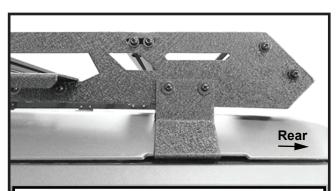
Line up the mounting holes in the front Wind Deflector with the threaded holes in the Mounting Brackets, and attach with each other. IMPORTANT: DO NOT slide the Rack Assembly on the roof of the vehicle to prevent damage to the finish
